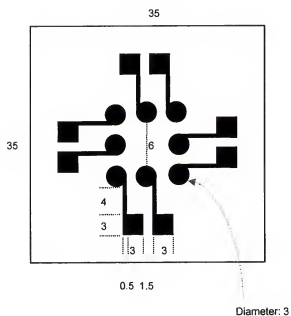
Mask for metal deposition of electrodes. The mask is made of stainless steel and is 1 mm thick. All dimensions are in millimeters.
